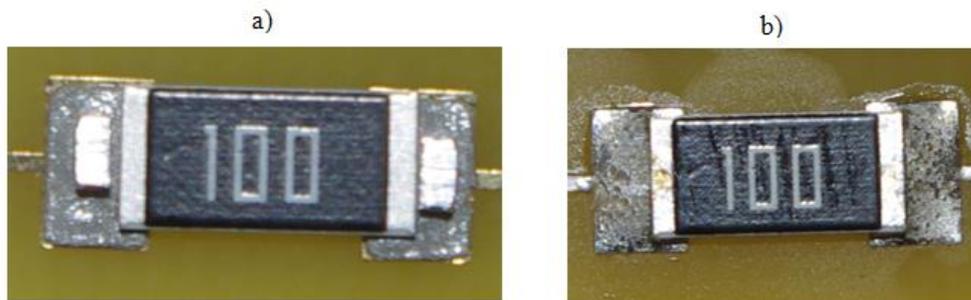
Solder fortification method – (a) Solder preforms mounted to paste before soldering in vapors (b) Solder preforms and solder paste after soldering in vapors
